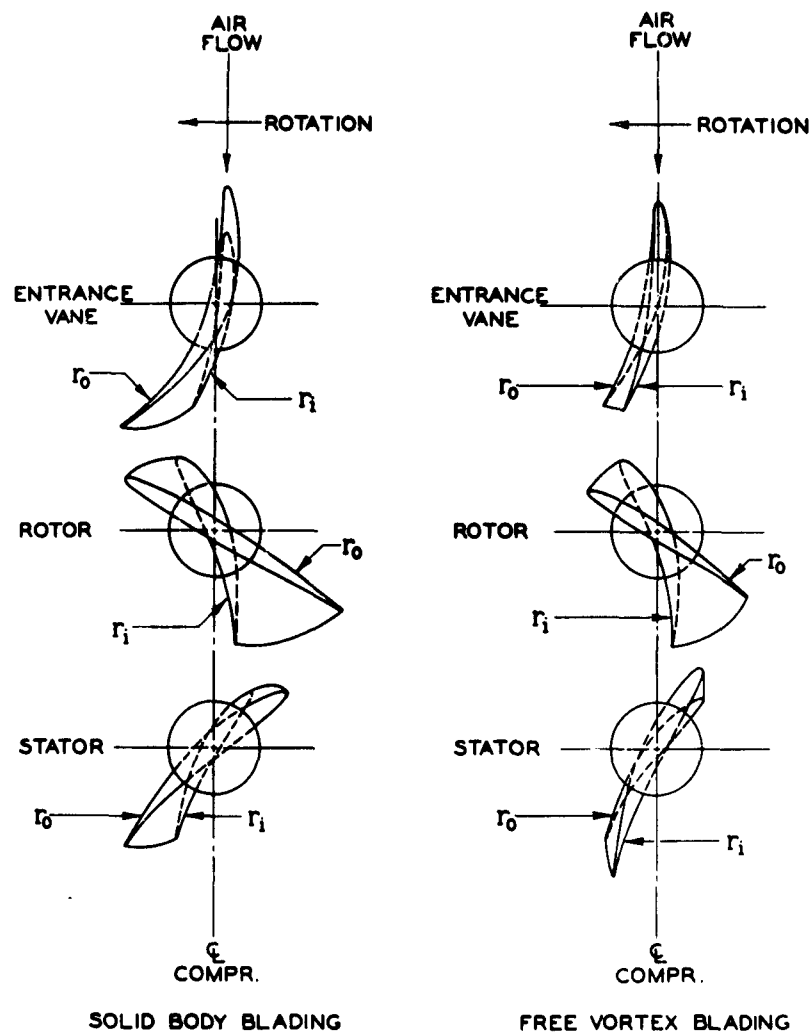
Root and Tip Sections of the Two Types of Compressor Blading
